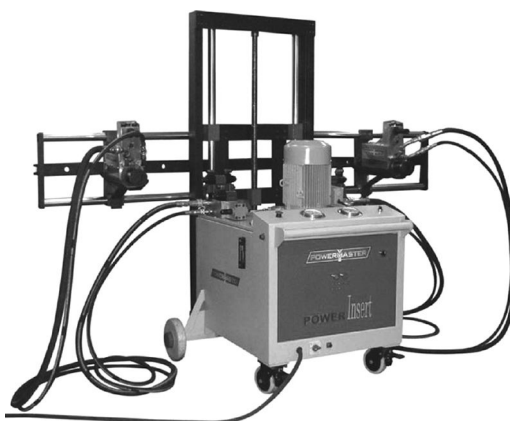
Tube bundle inserter for heat exchanger. (Courtesy of Powermaster Ltd, Mumbai, India.)
